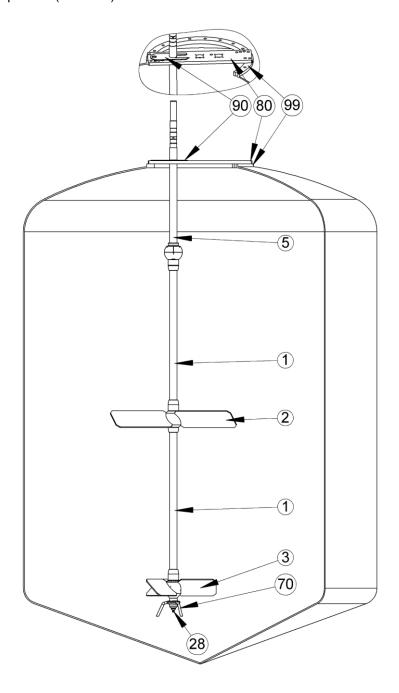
, Shaft positioned with mounting tool pos. 80 or 81 and 90
